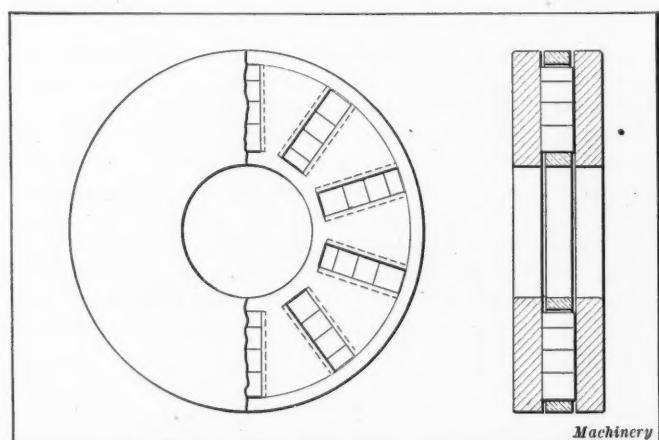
Roller Thrust Bearing with Cylindrical Rollers. Theoretically, the Design of this Bearing is Wrong, but it is said to give Good Results under Actual Conditions of Operation
